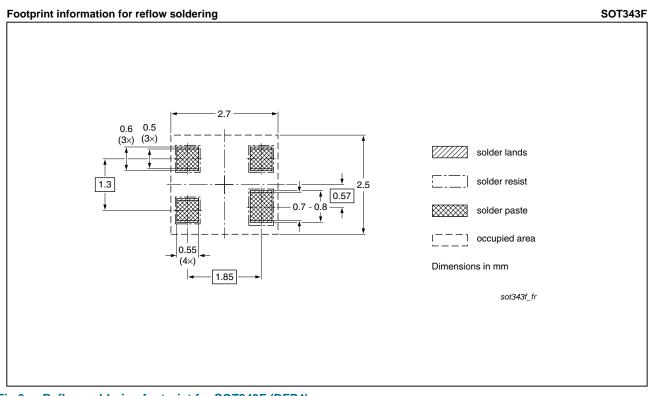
Reflow soldering footprint for SOT343F (DFP4)
